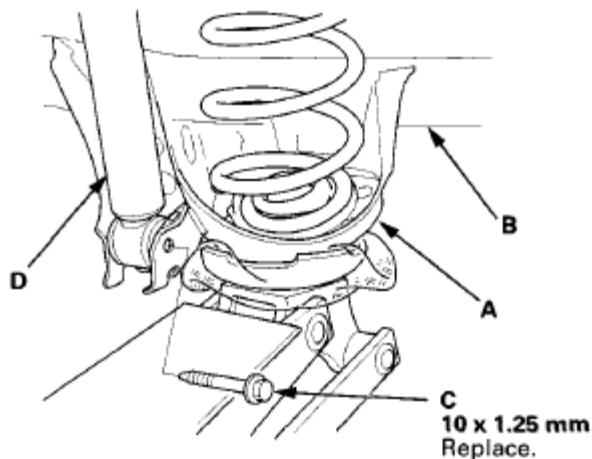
Identifying Floor Jack Under Lower Spring Seat, Axle Beam, Damper Mounting Bolt And Damper
